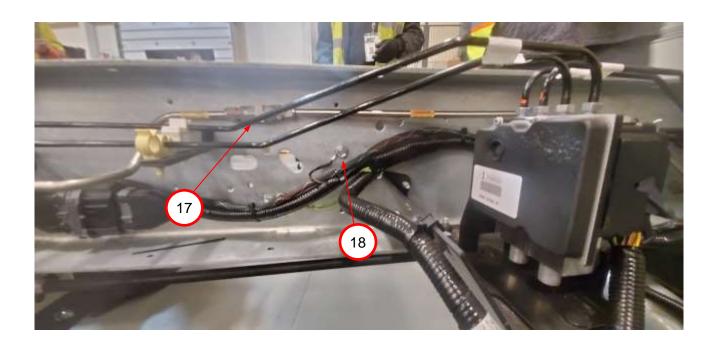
Driver side frame rail 1/4 turn valve (17), Ground bolt installed (18)
